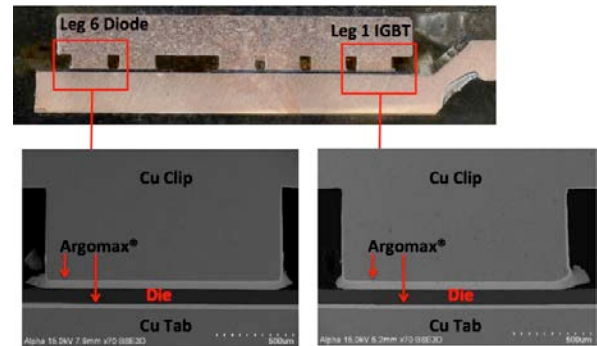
New, Ag-Sintered packaged component after assembly; note the highly uniform sintering layers, with no visible die tilting or cracking issues.
